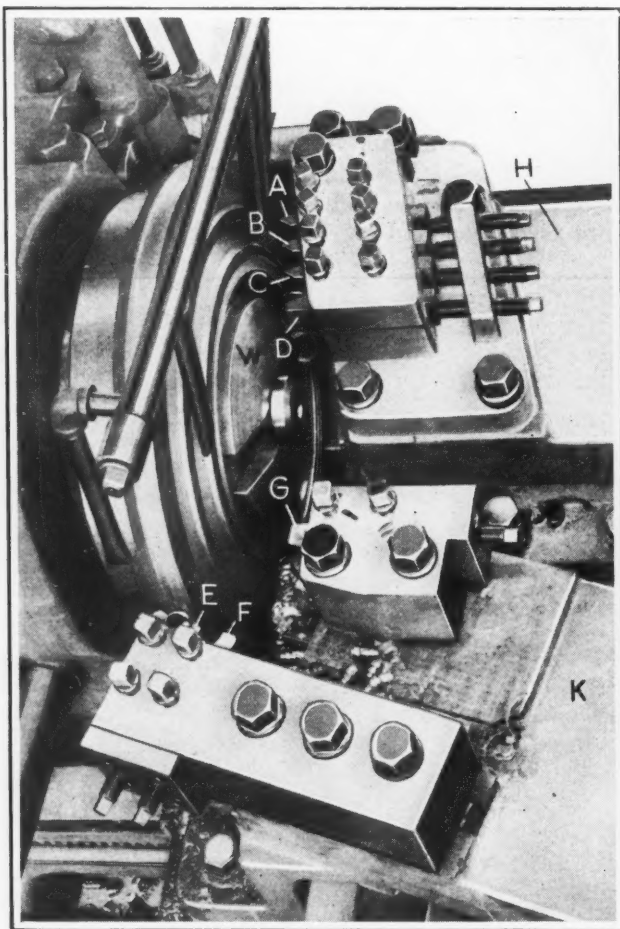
Close-up View of Gear Blank Facing and Periphery-turning Tools at Beginning of Cuts
